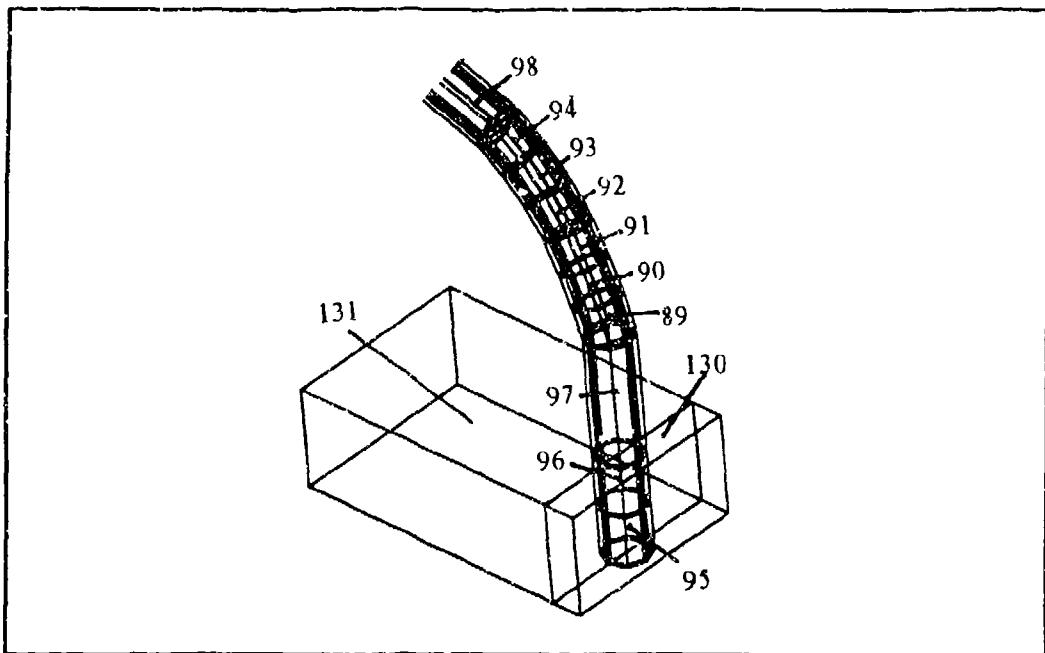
Nose Wheel Fork and Nose Wheel Attachment Tube
